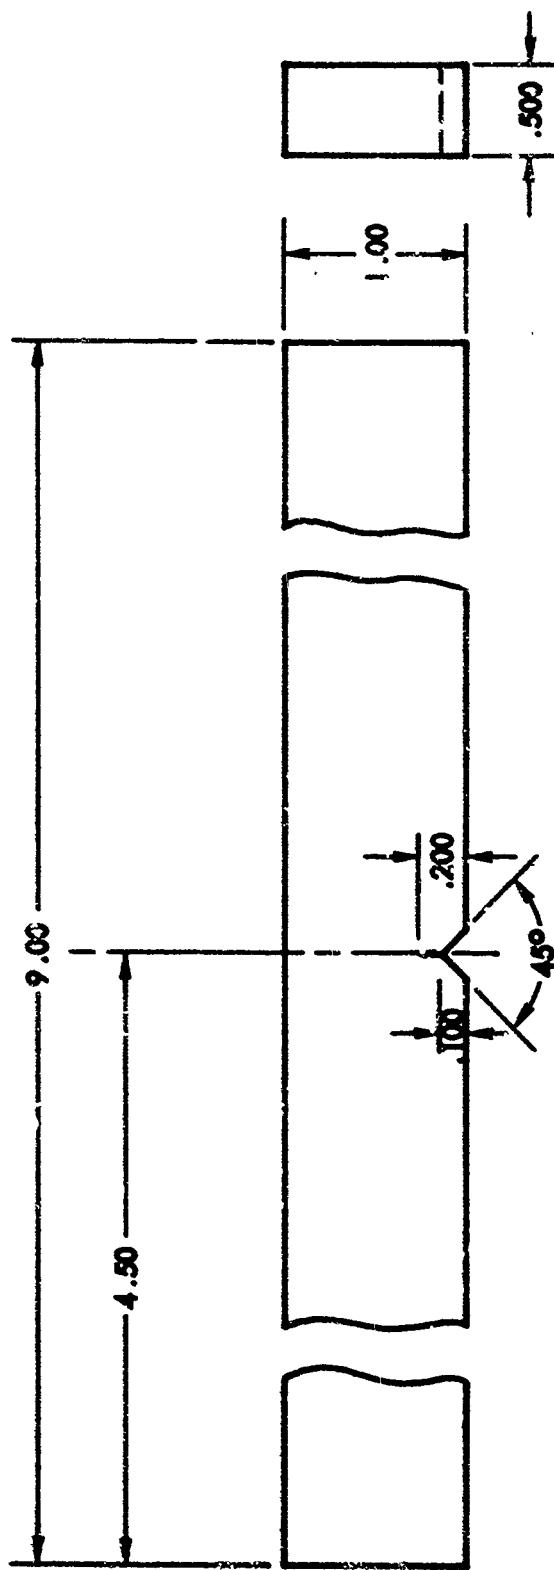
Fatigue Cracked Bend Specimen, Thick Extrusion
